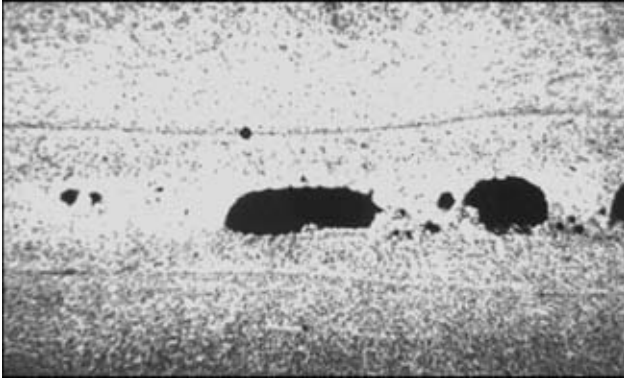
Macrostructure of PMMA welding zone (×60)
